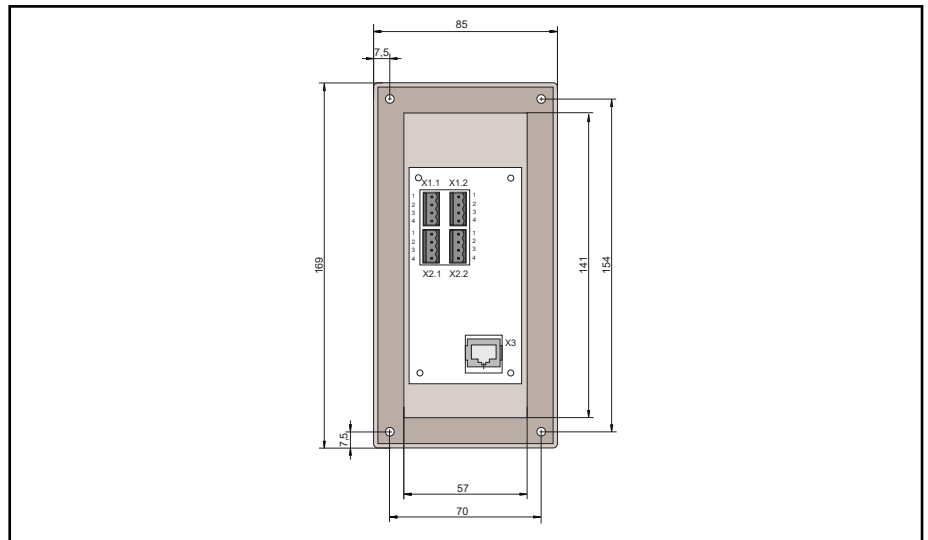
Housing and mounting dimensions, VAC 3x
